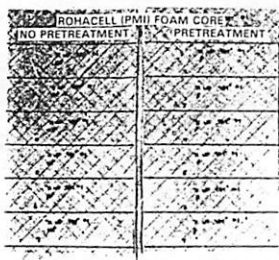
Labelled sandwich/skin laminates prior to machining into climbing drum peel specimens.
